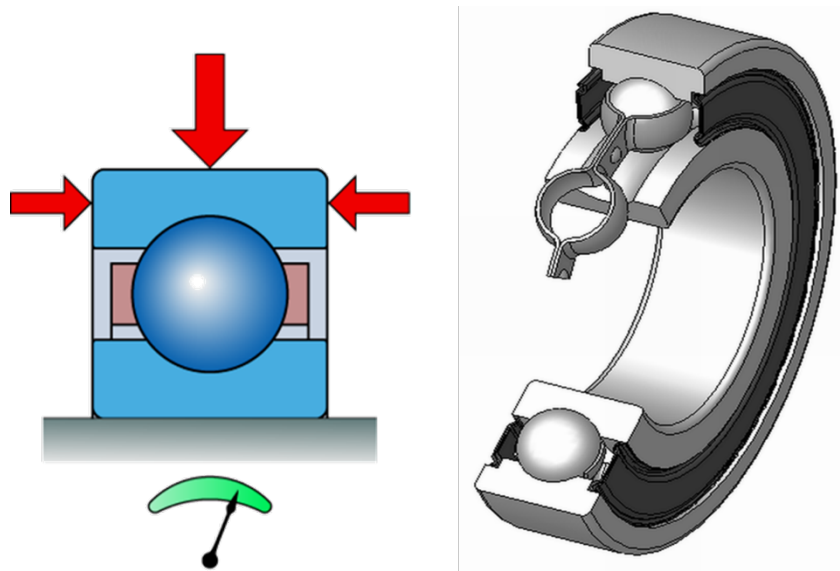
Test bearing of type NSK-6208, deep-groove ball bearing [5]
